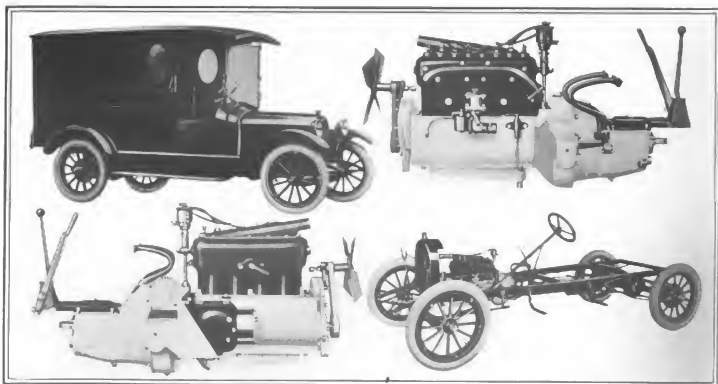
Detroit package vehicle, showing the complete panel-bodied car, two views of the motor and the stripped chassis. Note combination intake and exhaust manifold and starter application to motor and cantilever springs on chassis view
